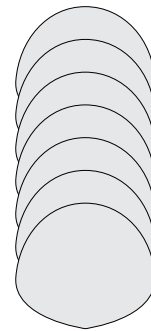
Not Enough Weld-Puddle Overlap
